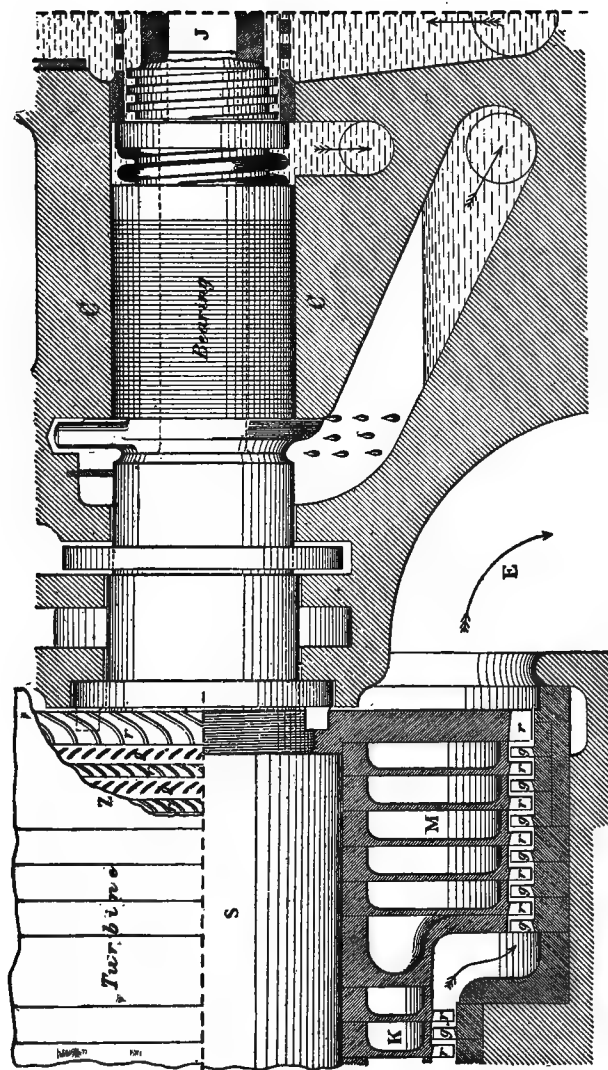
Section of one end of the turbine, and of the bearing, of Parsons's compound steam turbine.
